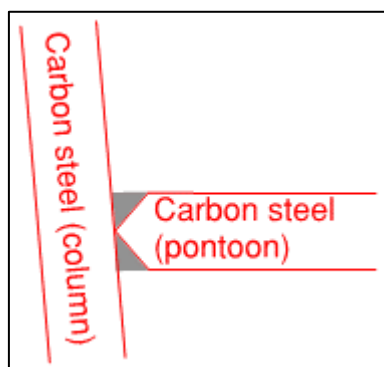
Weld between column and top plate (pontoon)
